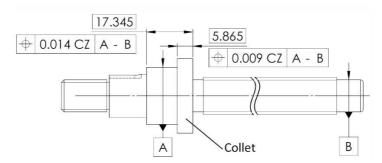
Drawing of (partial) definition of the shaft with these toleranced functional dimensions
